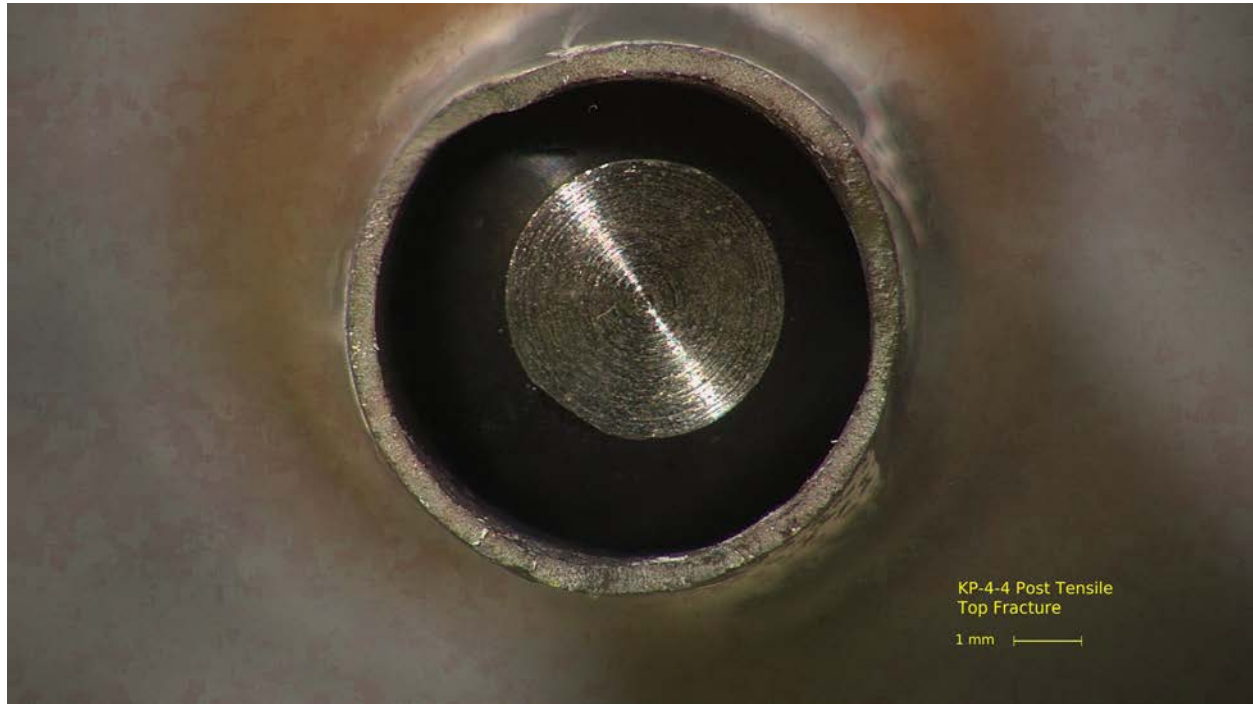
Post-Tensile Image Top Fracture for KP-4-4
